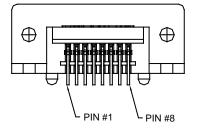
SR4210PCB Mount Receptacle Orthographic Drawing
